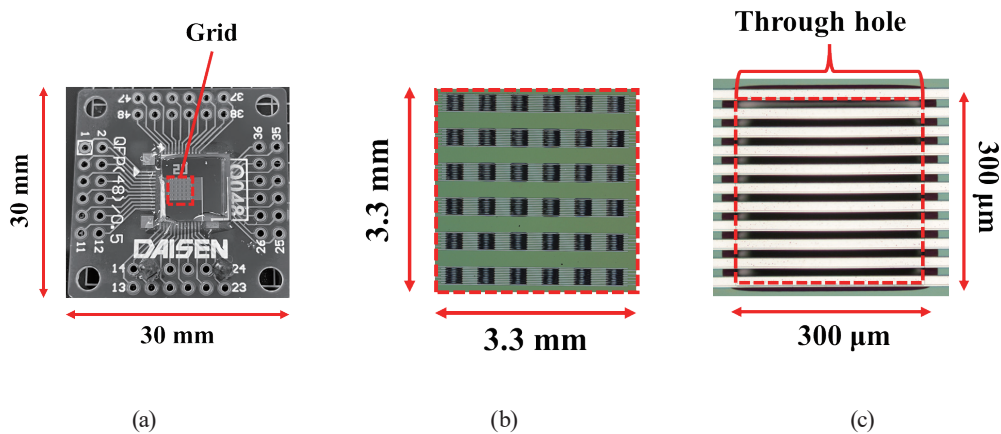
(Color online) Photograph of the fabricated grid. (a) PCB with fixed grid. (b) Through hole arrangement. (c) Microscopic photo of one through hole.
